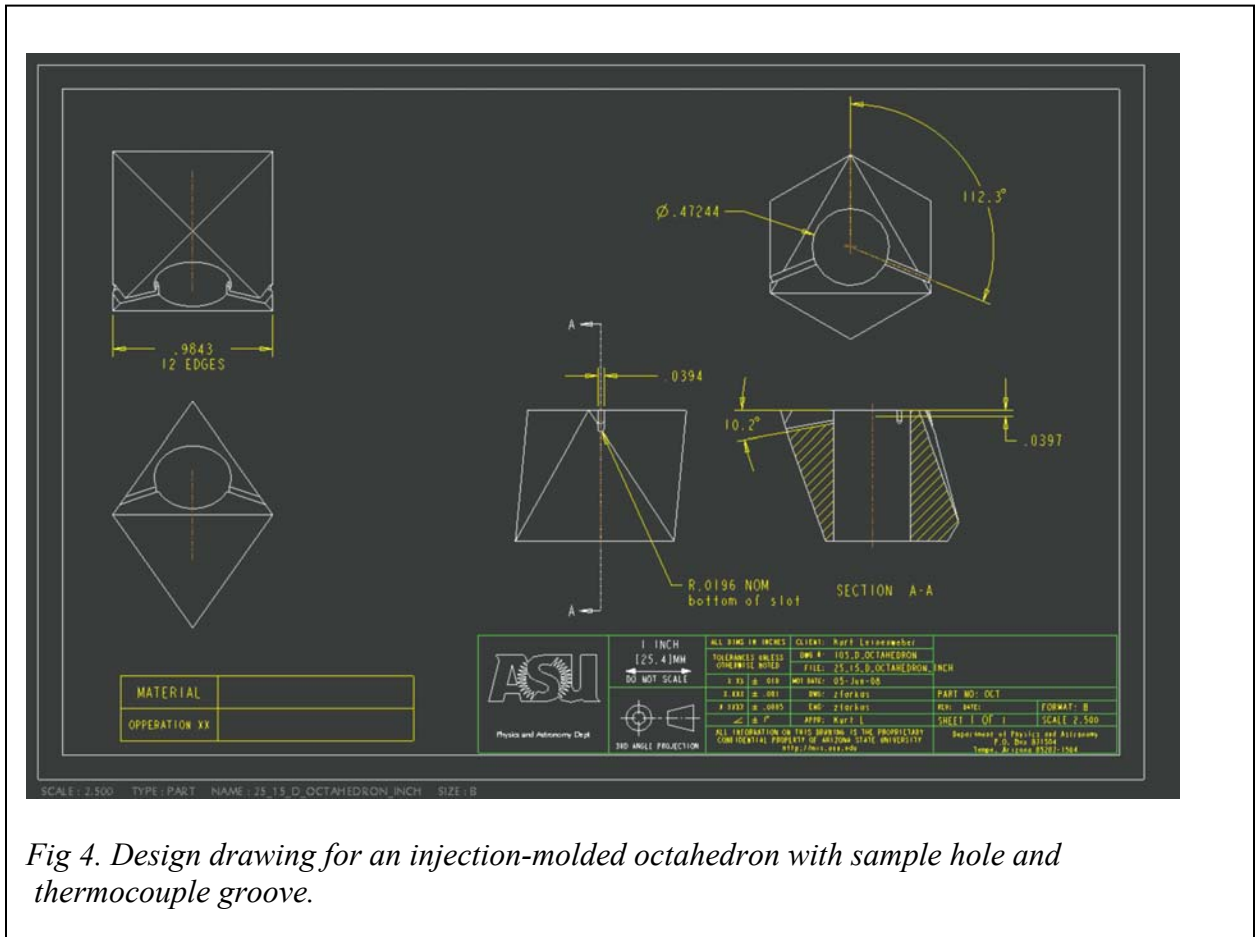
Design drawing for an injection-molded octahedron with sample hole and thermocouple groove.
